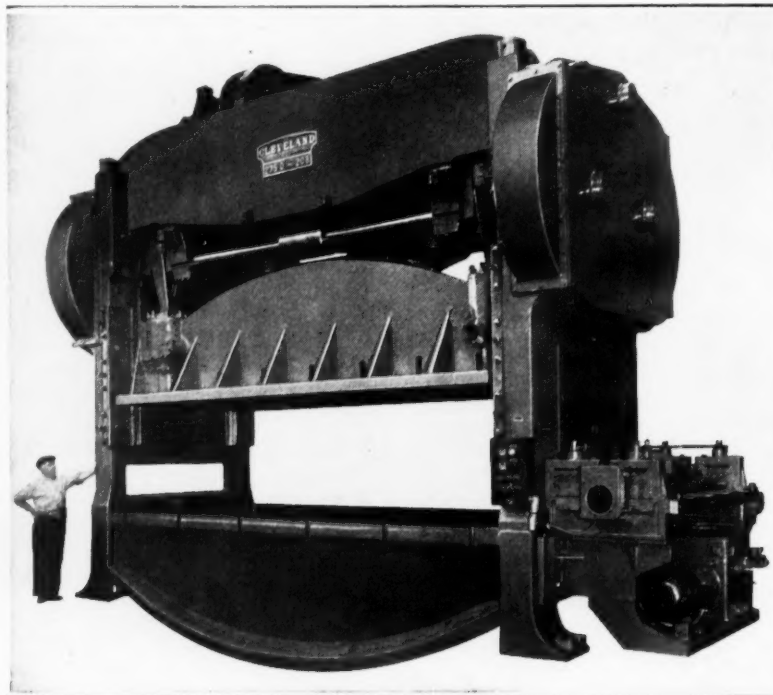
Cleveland Power Press Equipped with Automatic Roll Feed
